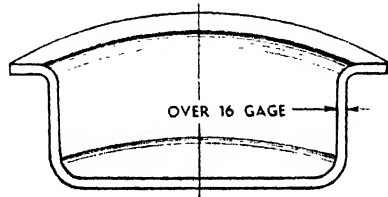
Drawn parts of ductile metal over 16 gage should have a radius under the flange not less than $1\frac{1}{2}$ times stock thickness.
